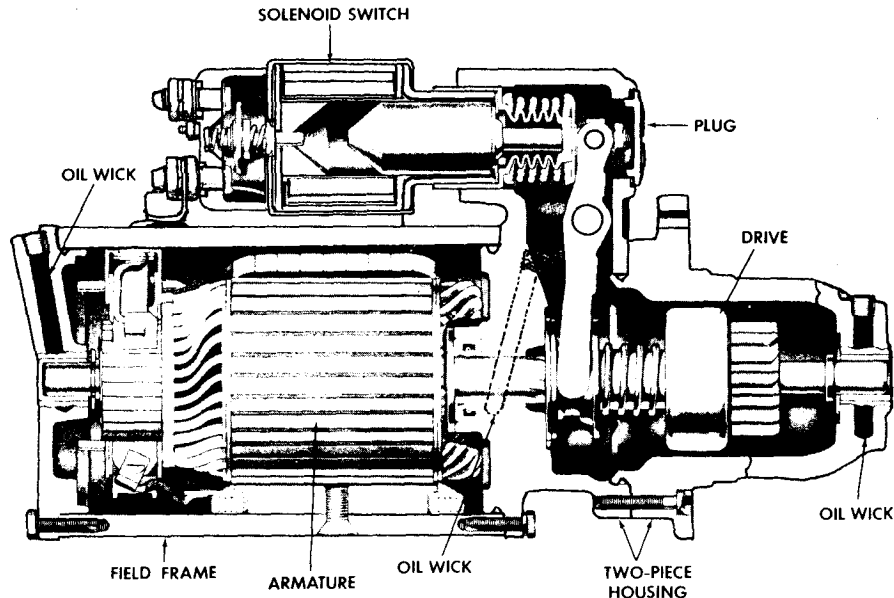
Cross-sectional view of motor with intermediate duty clutch. (35-MT) Note different attaching bolt construction than Figure 5.
